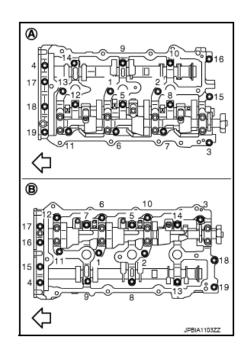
Cylinder Head Mounting Bolts Tightening Sequence (Bank 1 And 2) Courtesy of NISSAN MOTOR CO., U.S.A.
